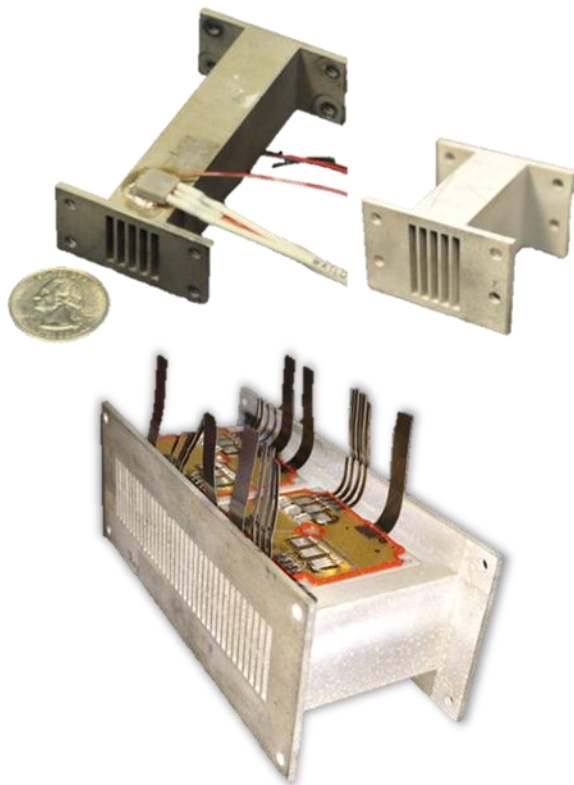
Baseline sub-module (top left), optimized (top right) sub-module, and module-level (bottom) heat exchangers fabricated from 6063 aluminum. Heaters are mounted on the top and bottom of the test section, one near the inlet edge and the other farther back. The flanges are for experimental convenience. The module-level heat exchanger shows electrical components mounted (tested by ORNL). Photo credit (bottom): Madhu Chinthavali, courtesy ORNL.
